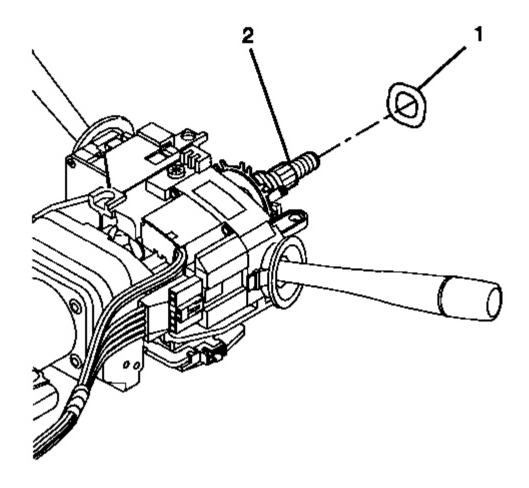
Wave Washer & Steering Shaft Courtesy of GENERAL MOTORS CORP.
